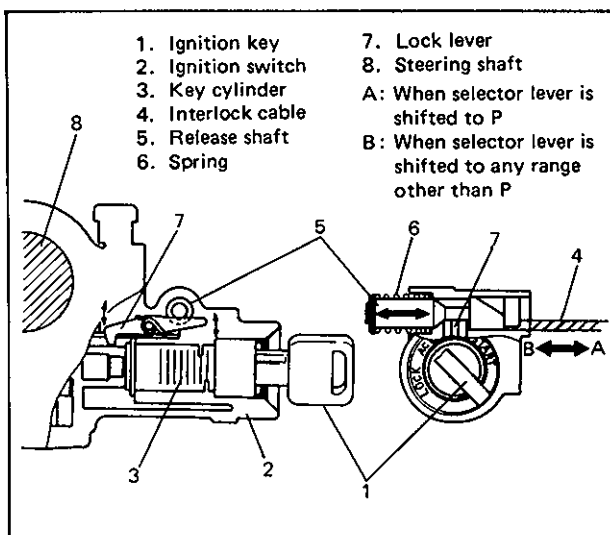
B-7-4 Ignition Switch Lock Mechanism
